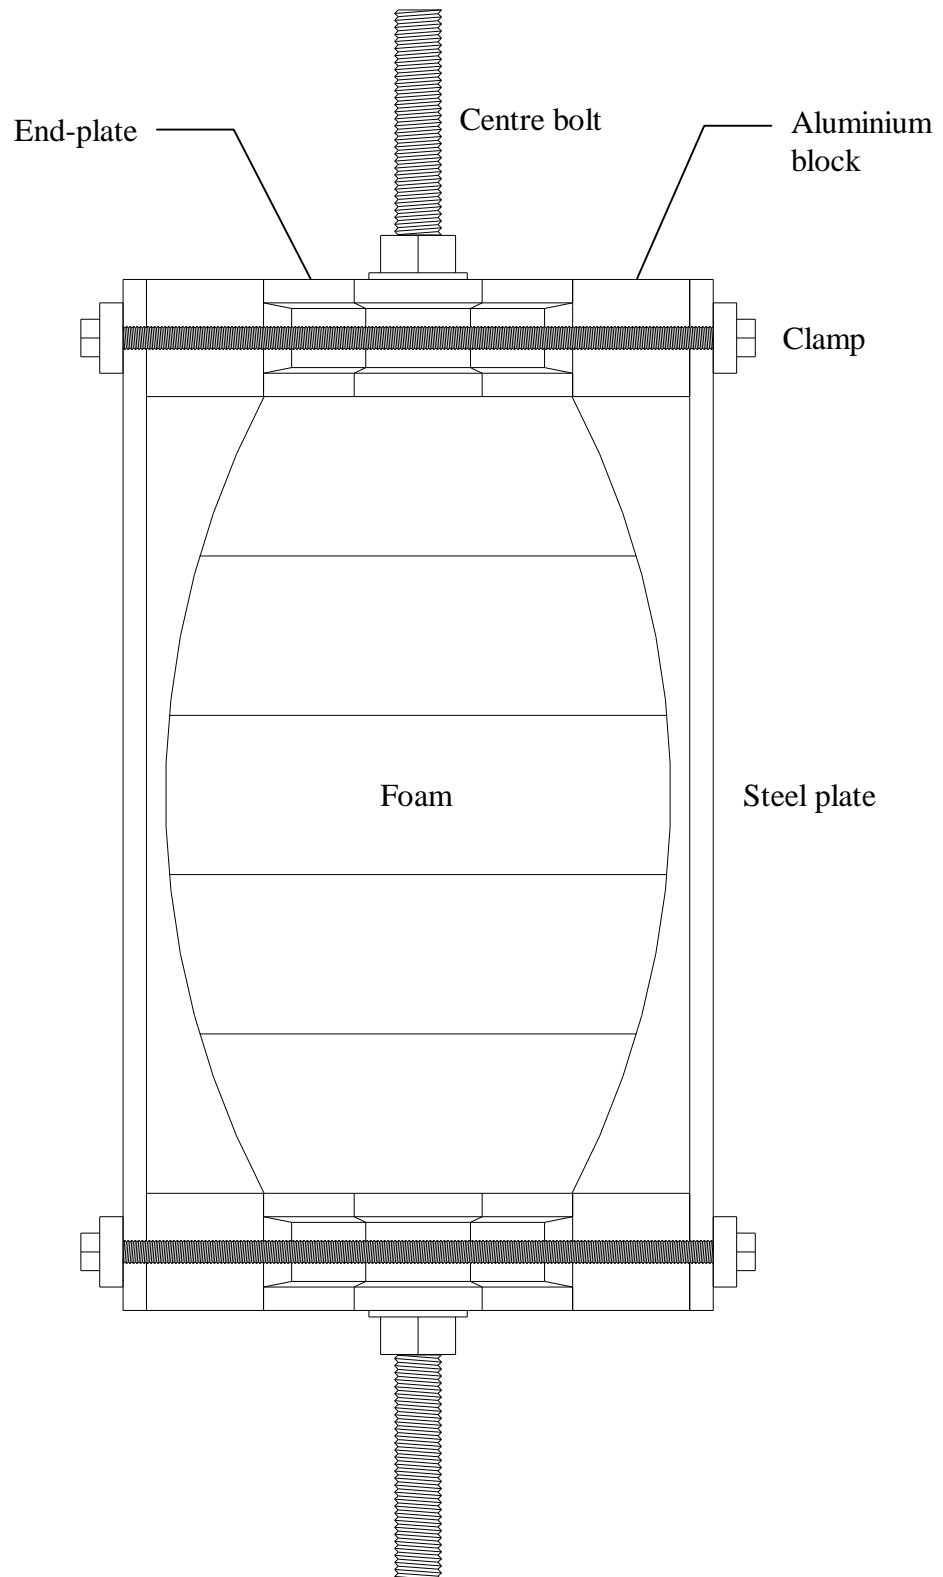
Clamping arrangement used to ensure that both end-plates aligned. Two mild steel plates span between the end-plates. These are mounted on aluminium blocks so that the plates clear the compliant foam region. The plates are then clamped in place at each end, thus aligning the two end-plates.
